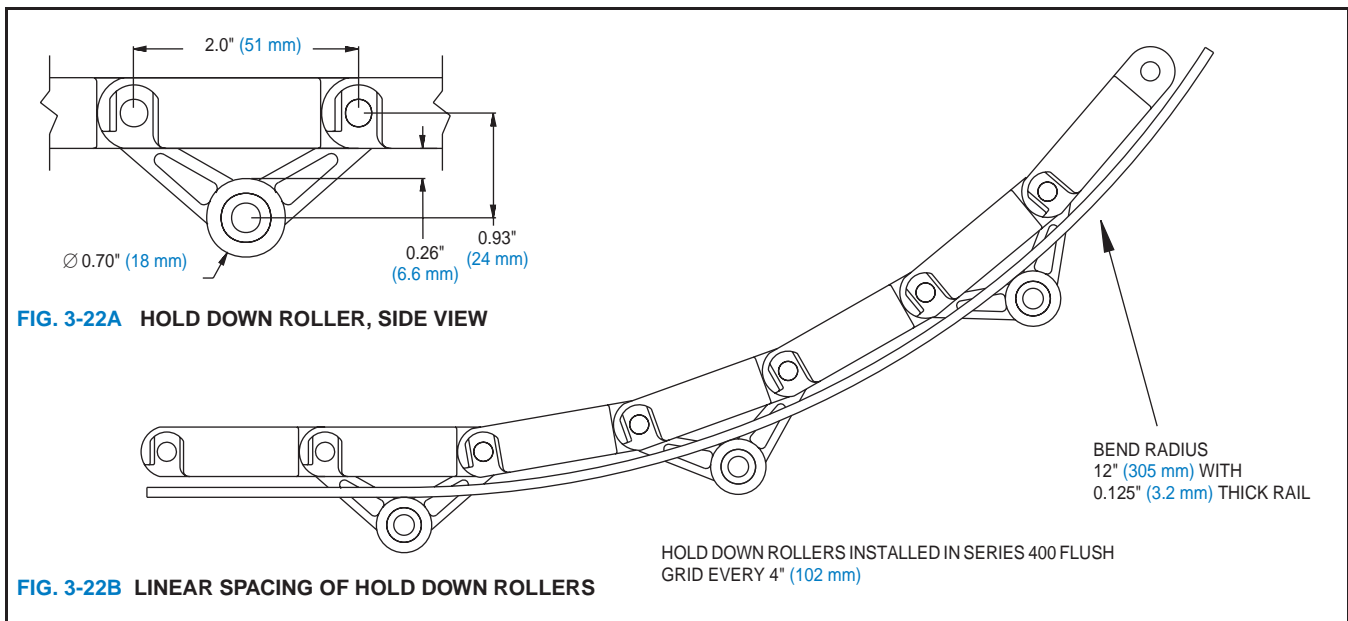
A HOLD DOWN ROLLER, SIDE VIEW
